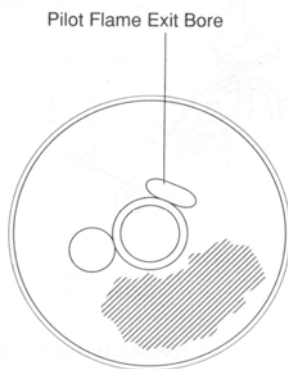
Visual Inspection, Pilot Flame Exit Bore
